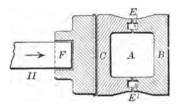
ILLINGWORTH'S PRESS FOR COMPRESSING STEEL INGOTS HORIZONTALLY WHILE SOLIDIFYING. Sectional Plans.
